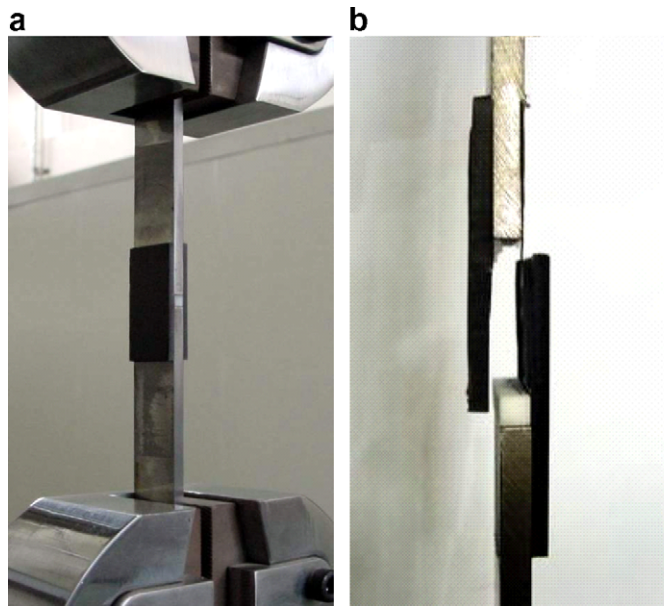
Tensile test of the double lap joint: (a) apparatus and (b) fractured specimen.
